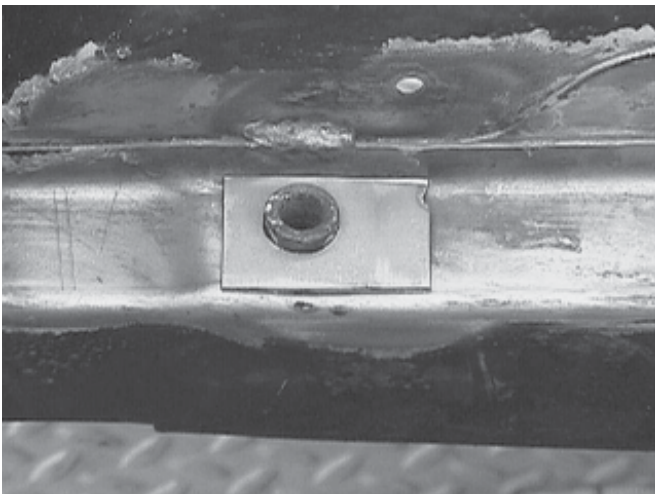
Here's the location of the front tube nut with the reinforcing plate in place, but unwelded. The concept is that this plate, when welded to the top of the tube nut, can carry the loads to the sides of the frame stamping. To assure this load transfer, the perimeter of the reinforcing plate is welded to the frame. In order to get this plate to fit flush as shown, some combination of grinding of the factory welds and countersinking of the hole, from the bottom, is necessary.
